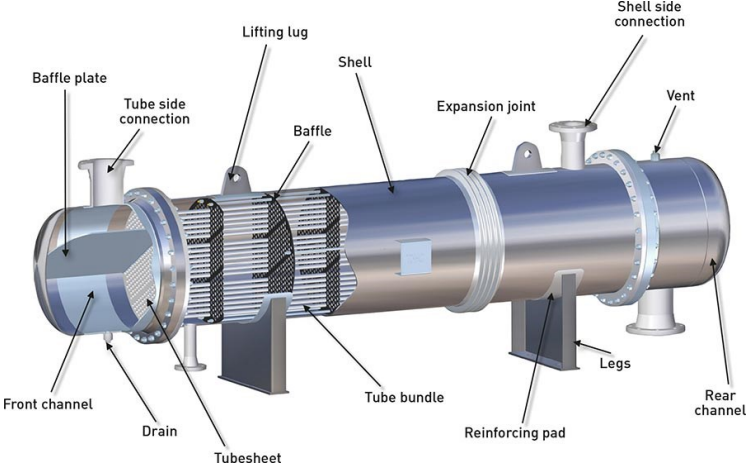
Shell & tube heat exchanger (Source: [11])
